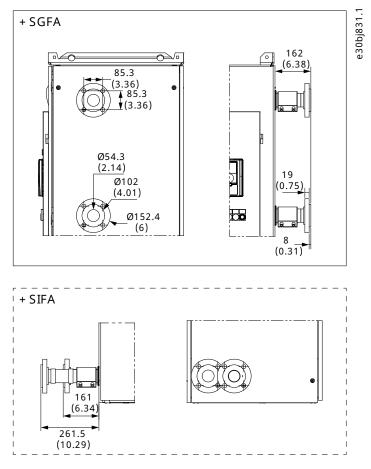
Dimensions of the Optional ANSI Flanges, +SGFA and +SIFA, in mm (in)
